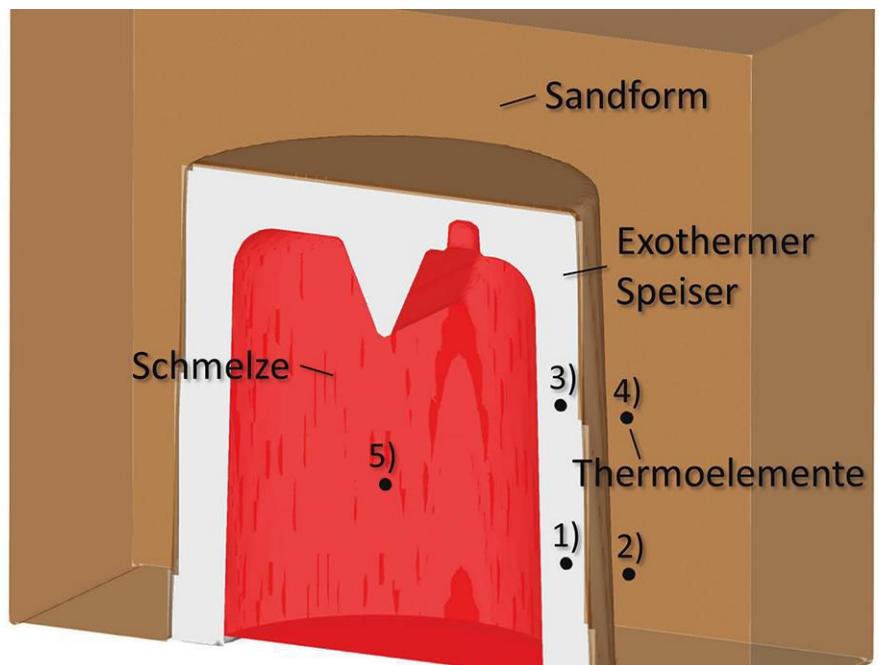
Thermocouples were positioned in five separate areas in the real casting trials.
